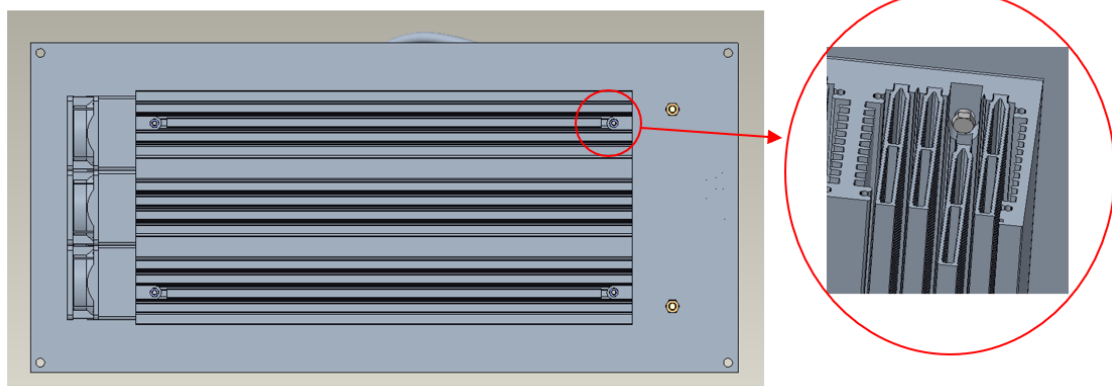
Heat Sink and Base Plate Mounting via Nuts (Left) Zoomed View.
